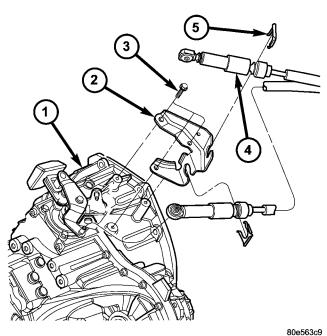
Gear Shift Cables and Bracket at Transaxle
